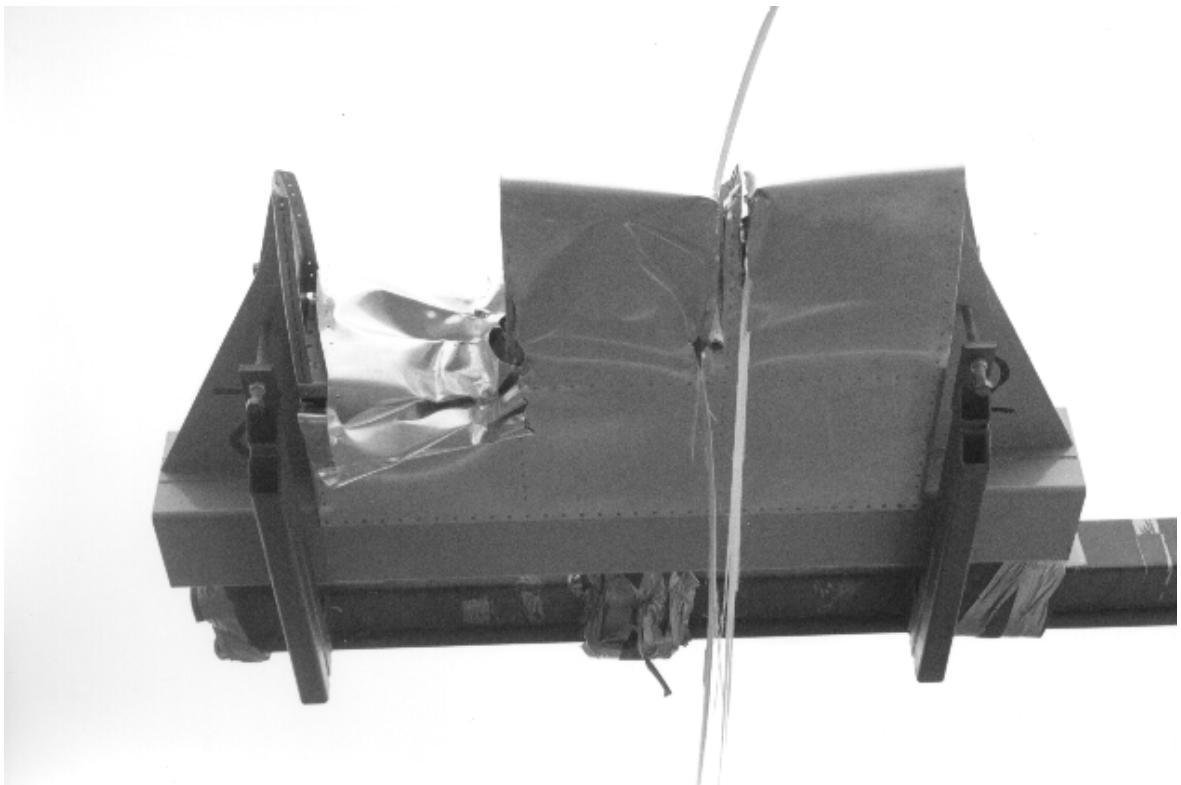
Damaged wing section after the test 2. The leading edge skin panels were severely damaged but the inner load carrying structure remained intact.
